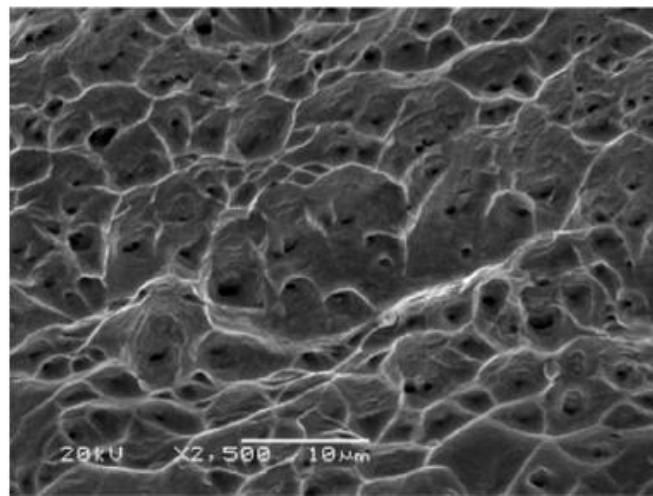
Fracture surface of the welded specimen observed by scanning electron microscopy. Fracture occurred in the base material.
